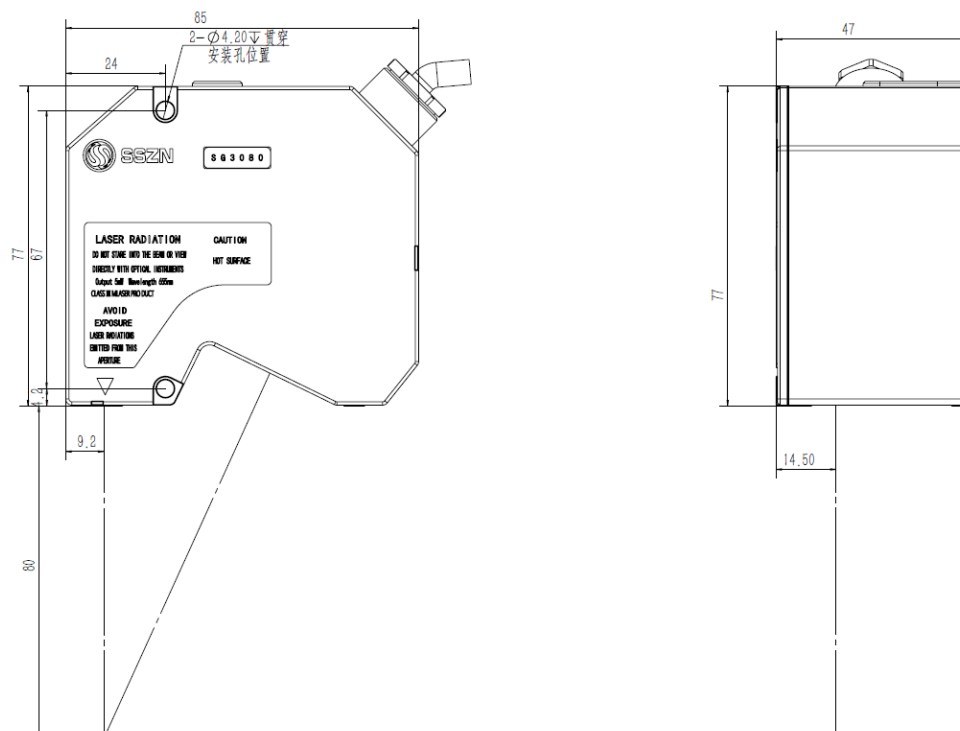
SG3080/5 Sensor Head dimensional diagram Unit (mm)
